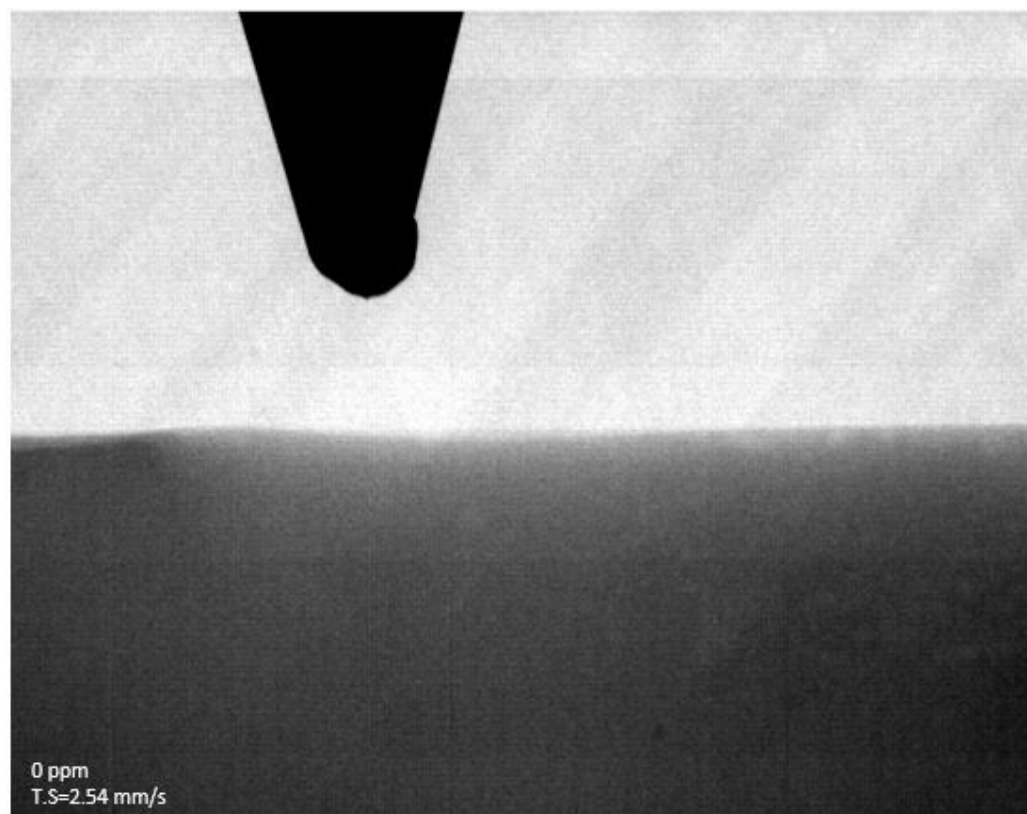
Alloy 6061 welded using 0 ppm of shielding gas hydrogen at 2.54 mm/s.
